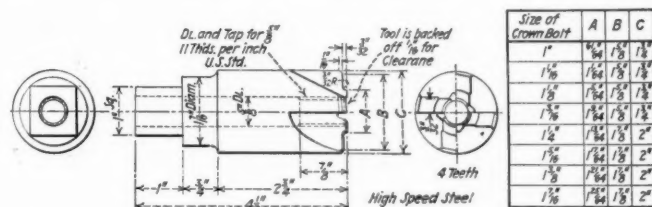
Air motor tool for use in counterboring holes in crown sheets
